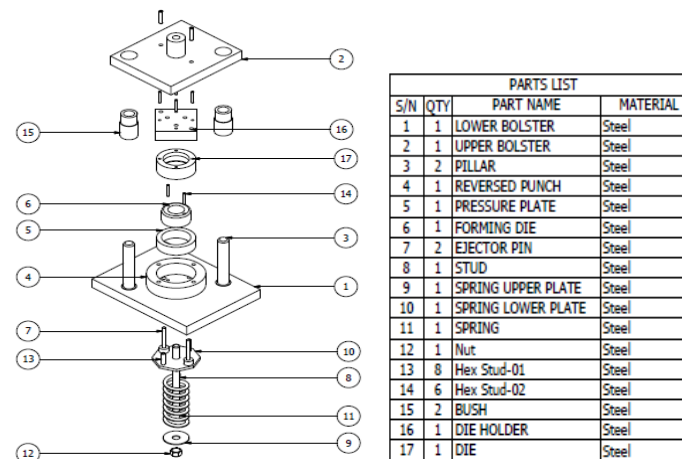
Exploded View of Combination Die for LPG Gas Burner Manufacturing
